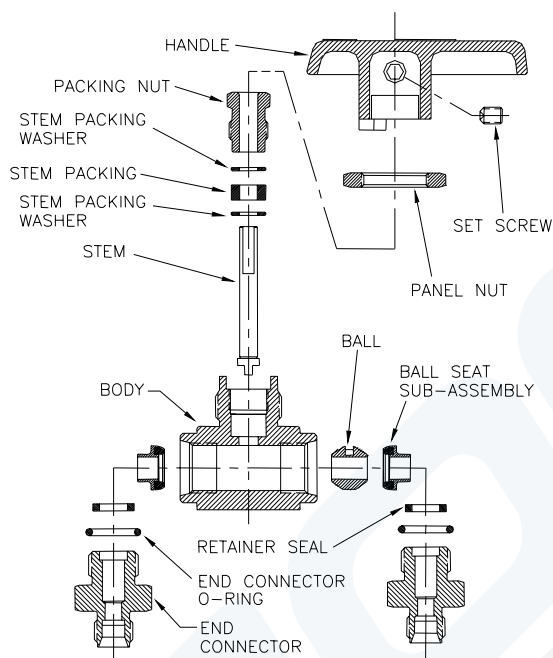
Ball Valve Assembly with PTFE Packing Exploded View
